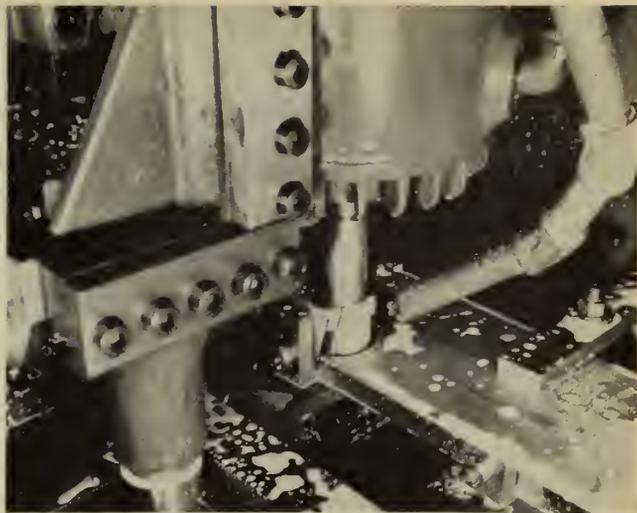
Machining a spar cap with a 2 $\frac{1}{4}$ -in. dia. cutter turning at 10,800 r.p.m. Depth of cut 2 $\frac{3}{4}$ -in. Feed 20 ft. per min.
